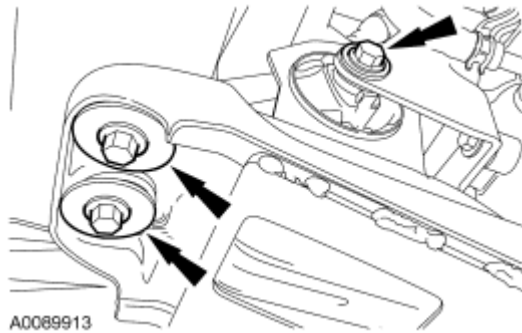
Identifying Front Roll Restrictor Bolt & Bolts For Engine Support Crossmember
